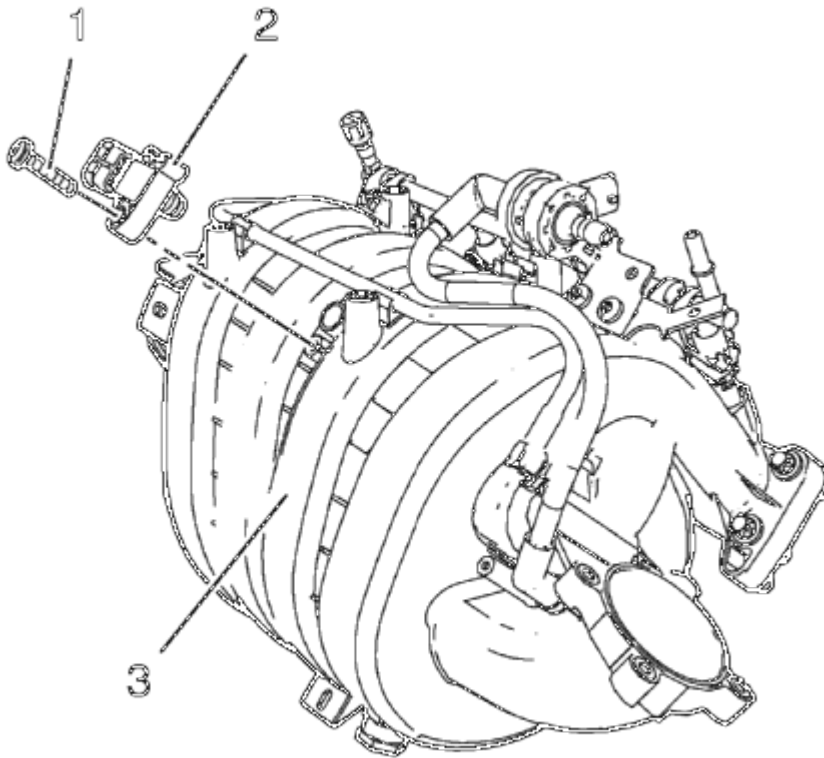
Intake Manifold, Manifold Absolute Pressure Sensor And Bolt
